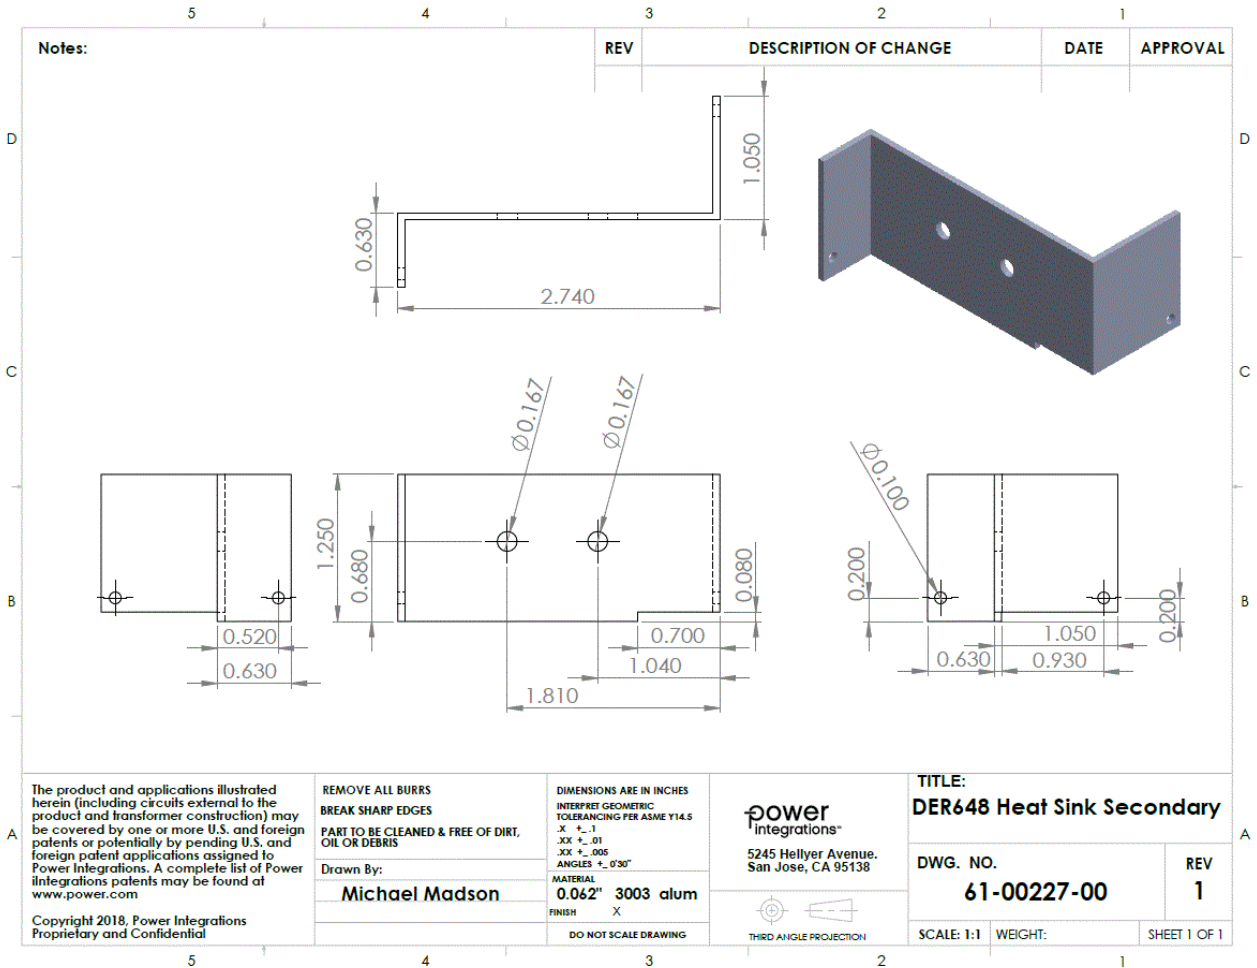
Secondary Heat Sink Sheet Metal Drawing.
